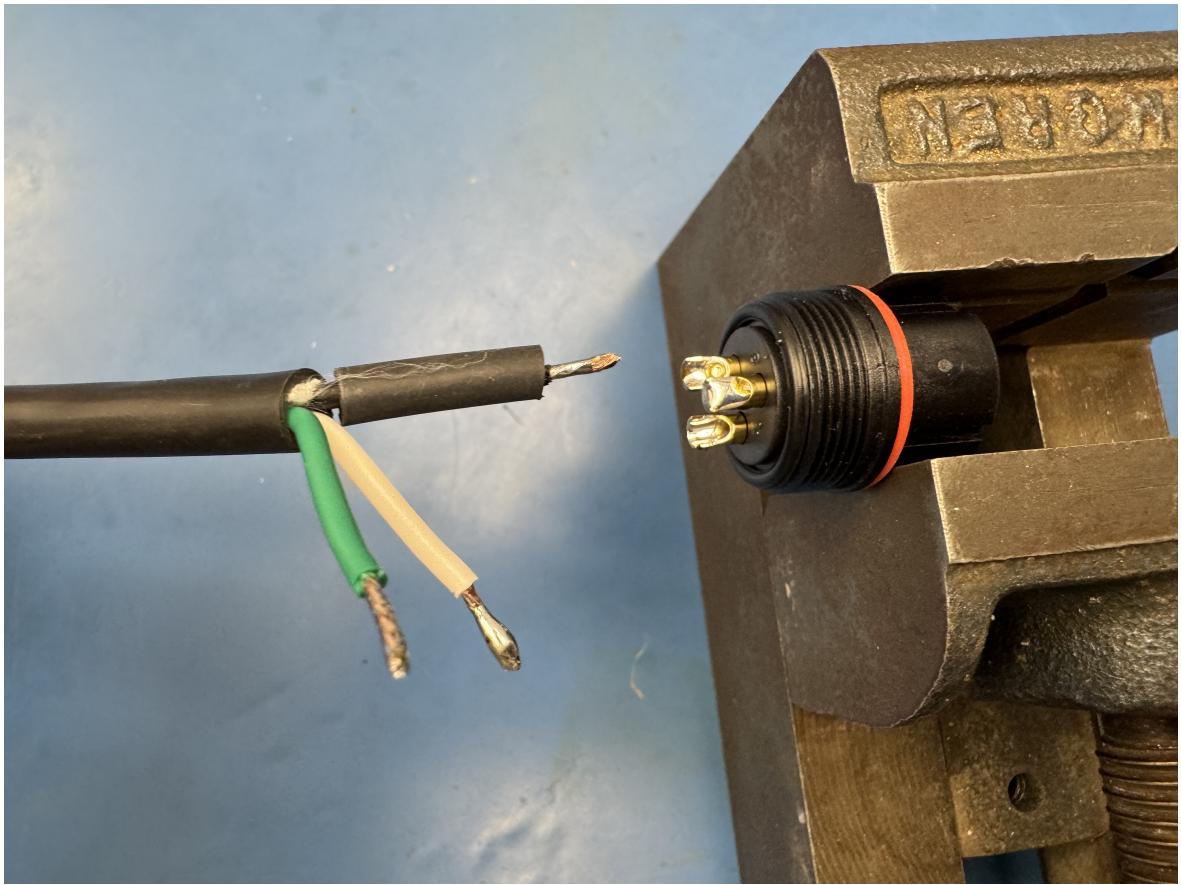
Next, strip the wire, put solder on the wire. Put solder on the connector terminals. Put the shrink tube on the wire. Solder the wired onto the connector according to the wiring diagram in Figure 2.
